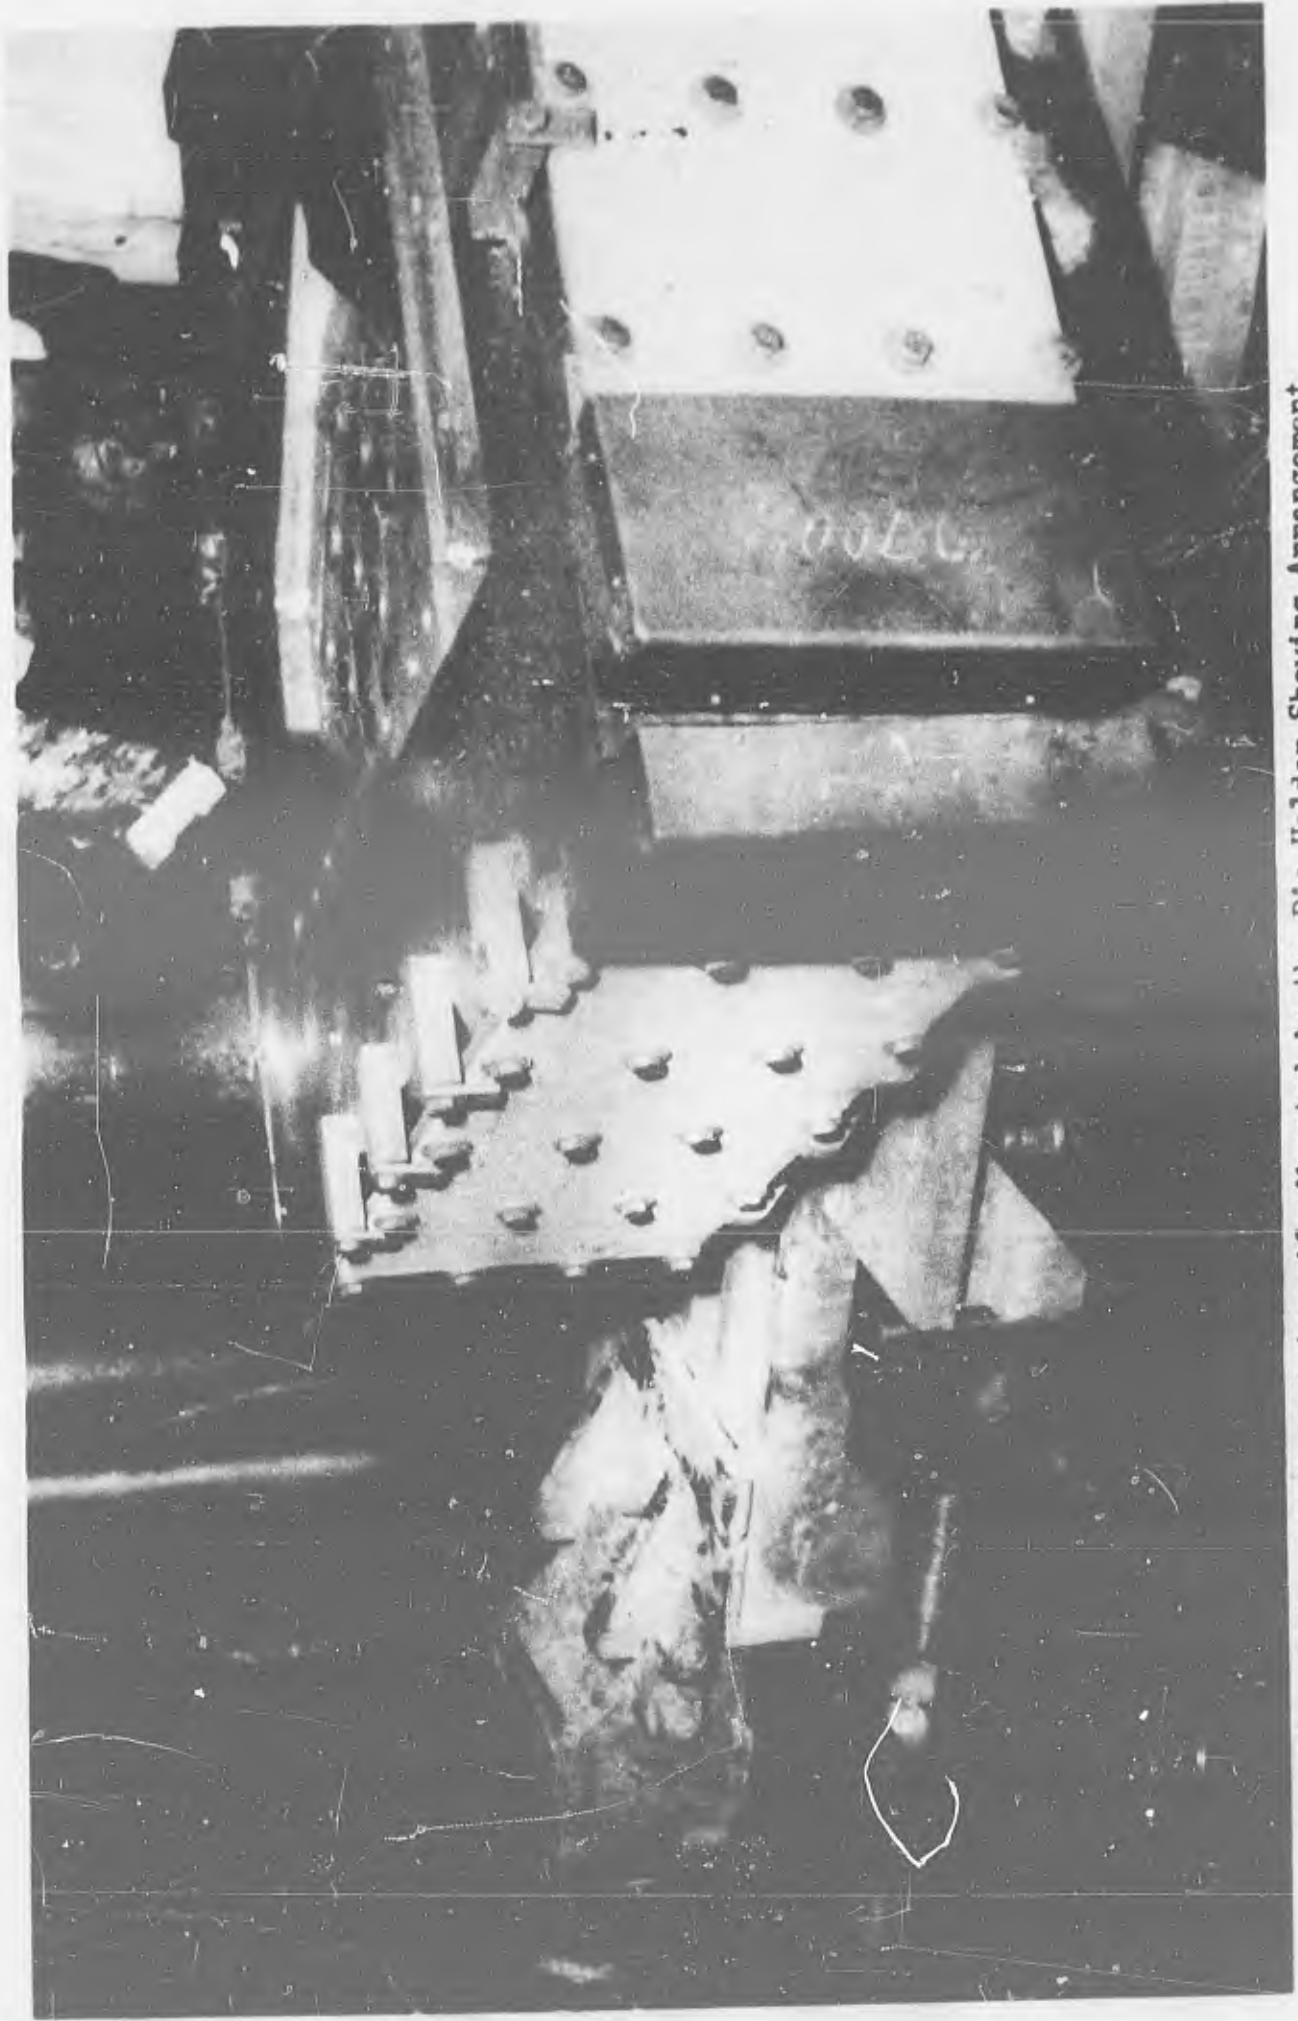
Die Insert, Assembly Mounted in the Die Holder Showing Arrangement of Electrical Heaters Around Periphery of Holder.
